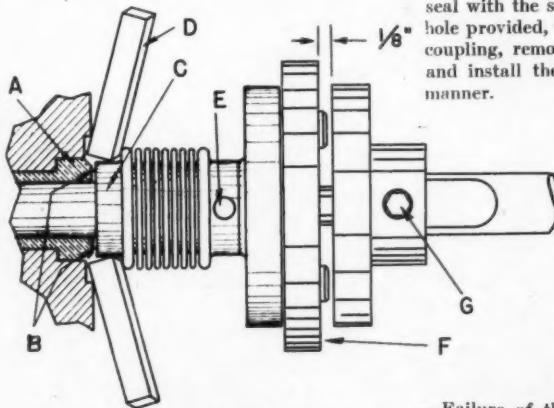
SEAL AND DRIVE COUPLING ASSEMBLY
